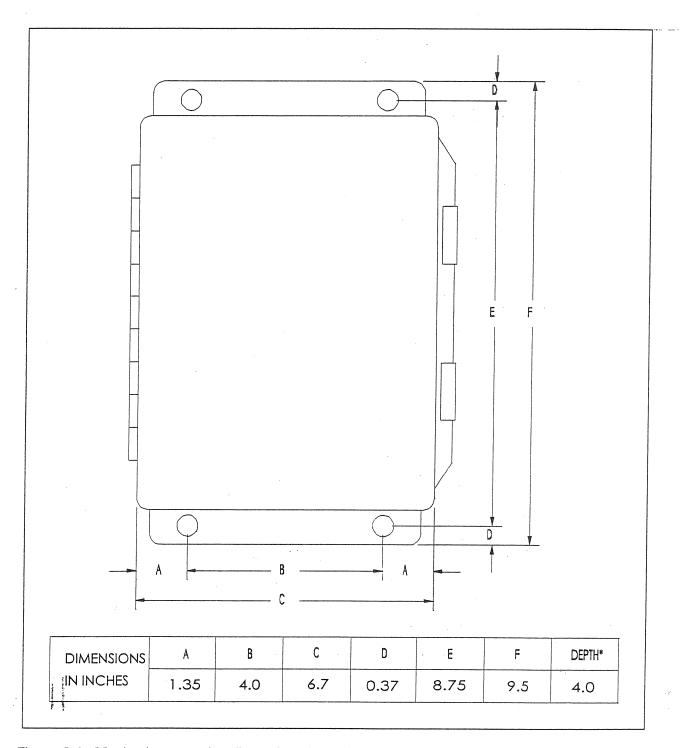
Monitoring mounting dimensions (dwg# 2590)
